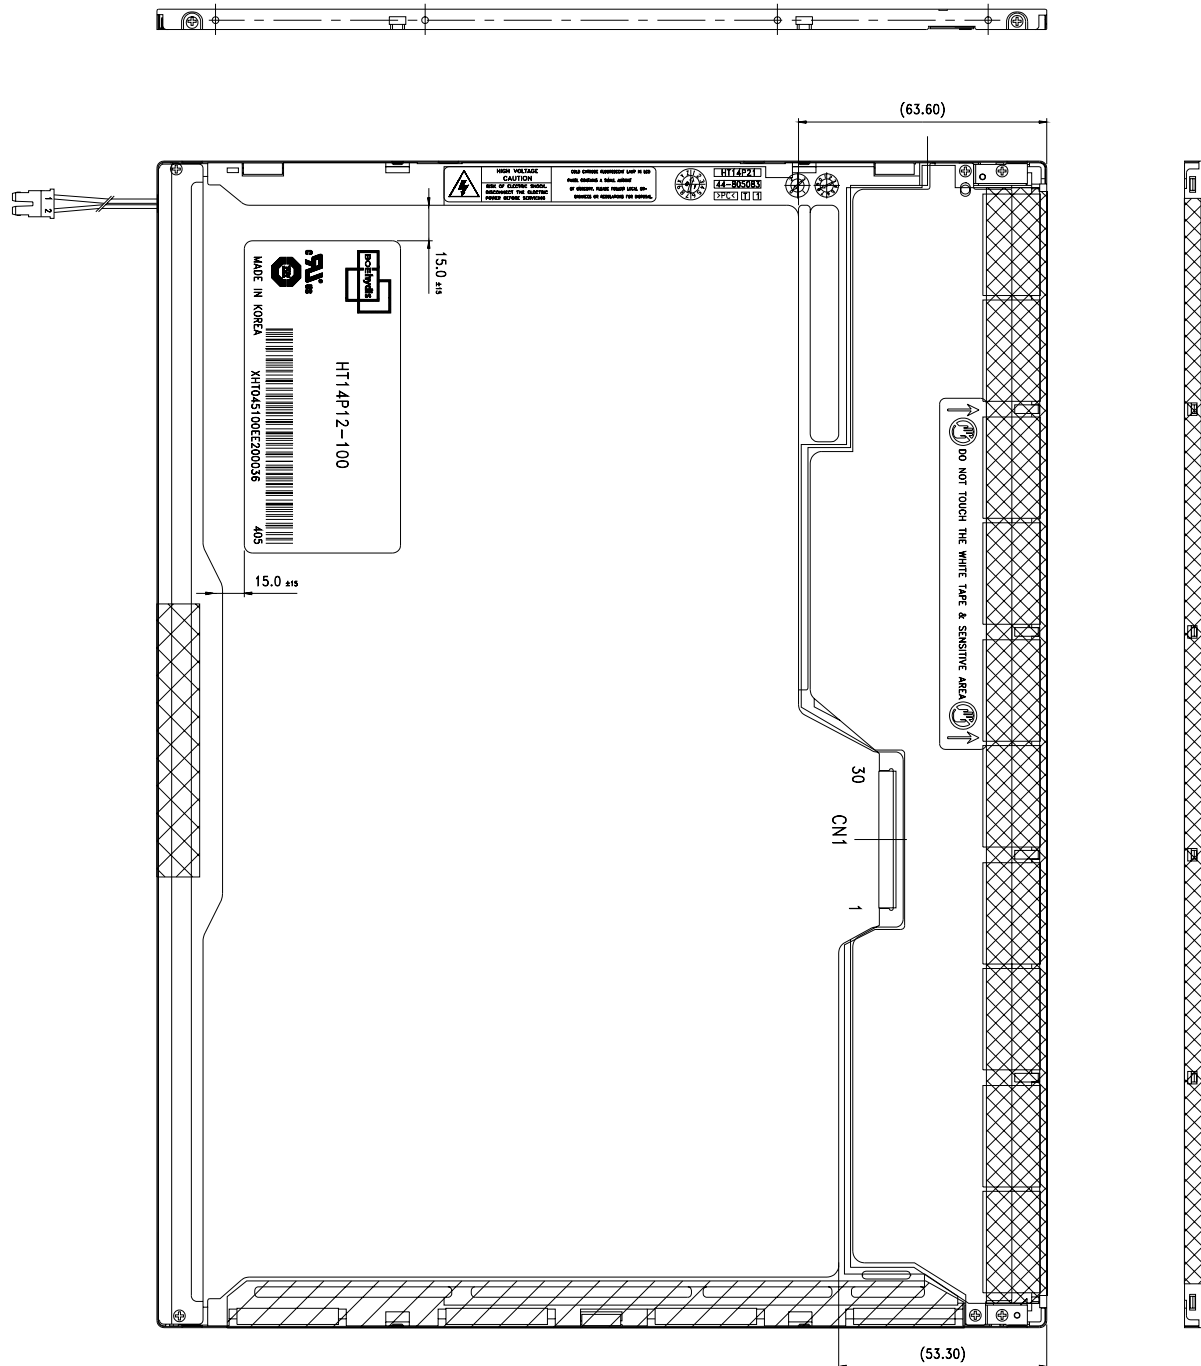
TFT-LCD Module Outline Dimensions (Rear view)
